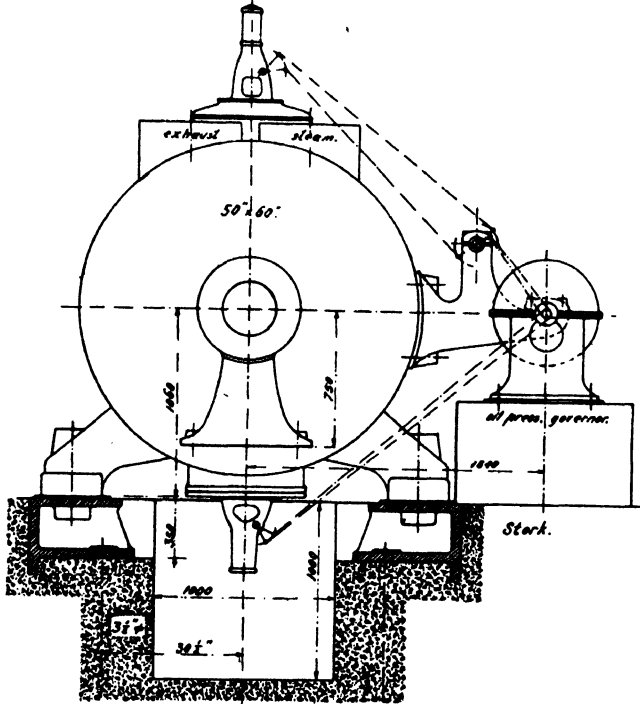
Poppet Valve Cylinder 50 in. × 60 in.
